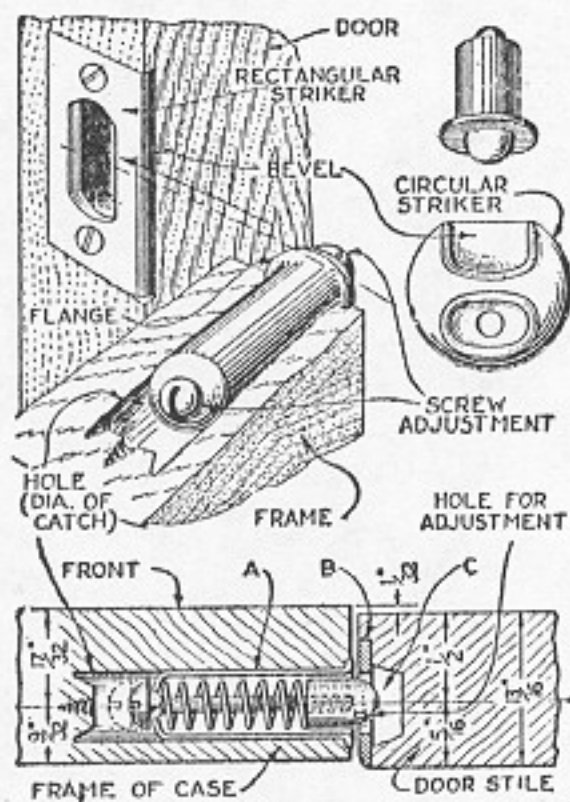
How a friction catch is inserted in a hole bored in the door frame and how the striker is fastened to the door.
